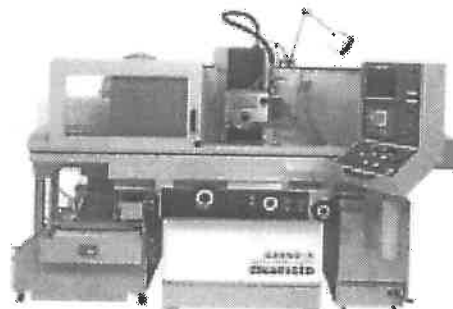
Surface grinding machine with linear motor driven table (HSSG) system
